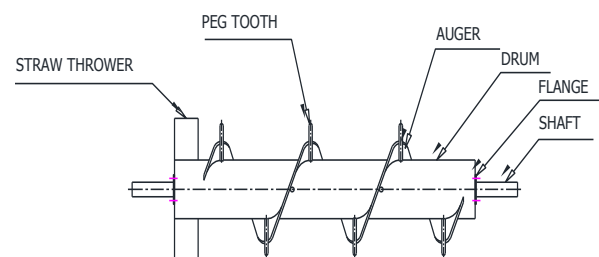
Peg-teeth and Screw Arrangement on Threshing Drum
